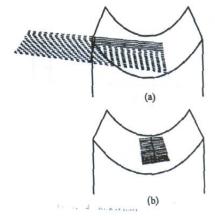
[2] Contact pattern for the worm gearing ZK:
